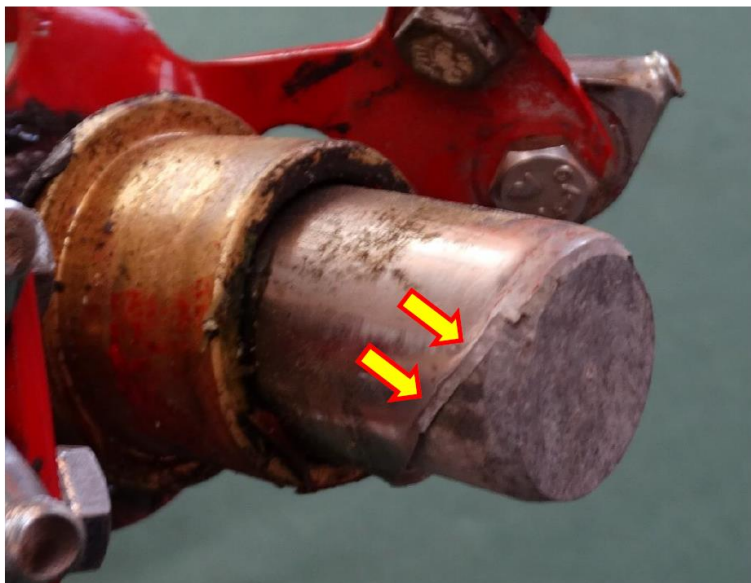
Nose wheel steering fork elliptical semi-circumferential fracture surface, yellow arrows denote left side fracture surface.
